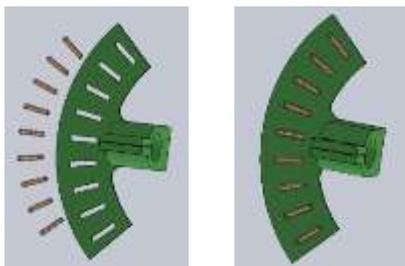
Exploded and combined schematic figure of copper coil and sheet structure
